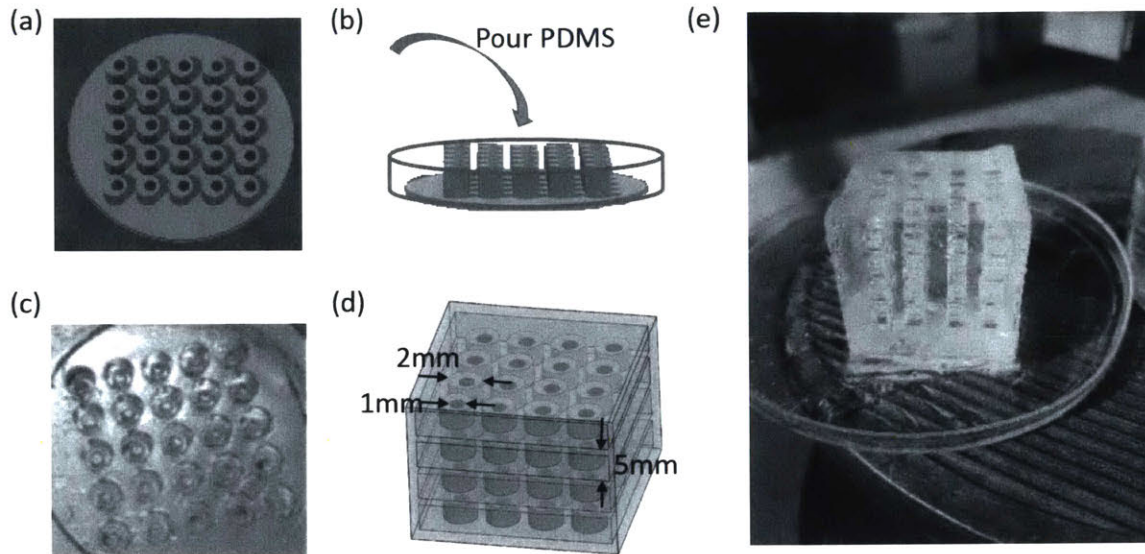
Fabrication of Willis material based on PDMS with asymmetric air inclusions. (a) 3D printed template. (b) Put the 3D printed template in a container, pour liquid PDMS into the container and cure to form one layer of Willis material. (c) A picture of one layer of Willis material. (d) Willis material block formed by stacking multiple layers. (e) A picture of the fabricated Willis material block.
